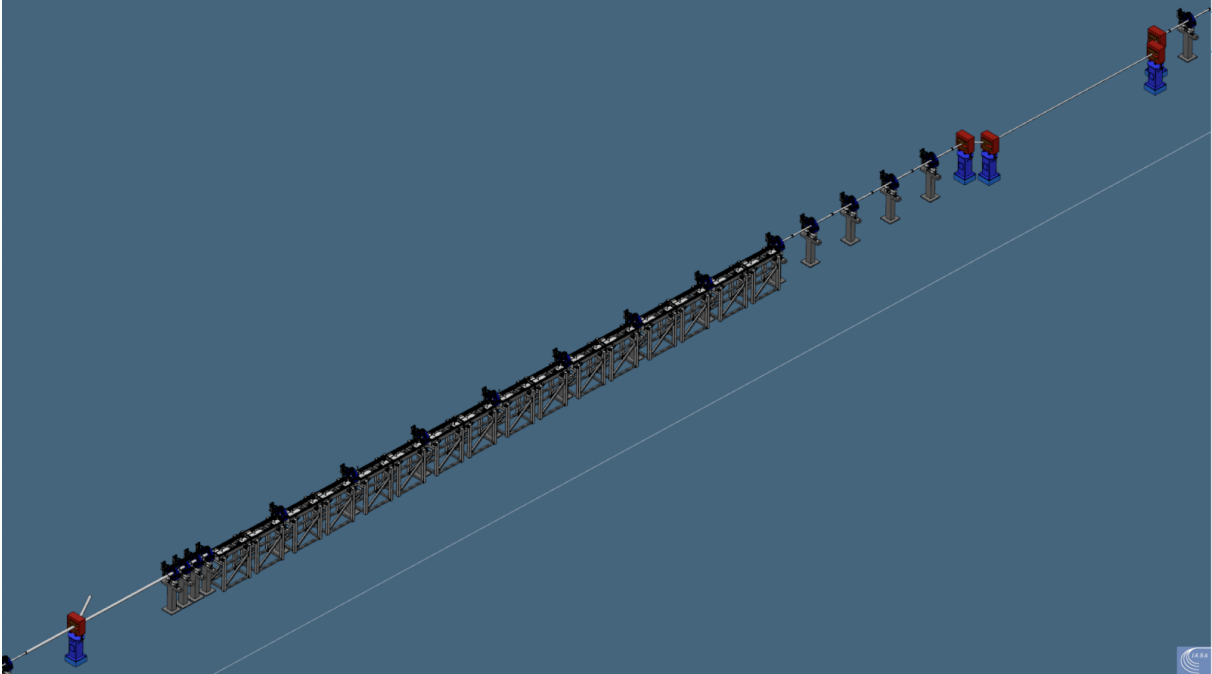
Linac 1 Preliminary 3D model Layout and Bunch Compressor 2.
